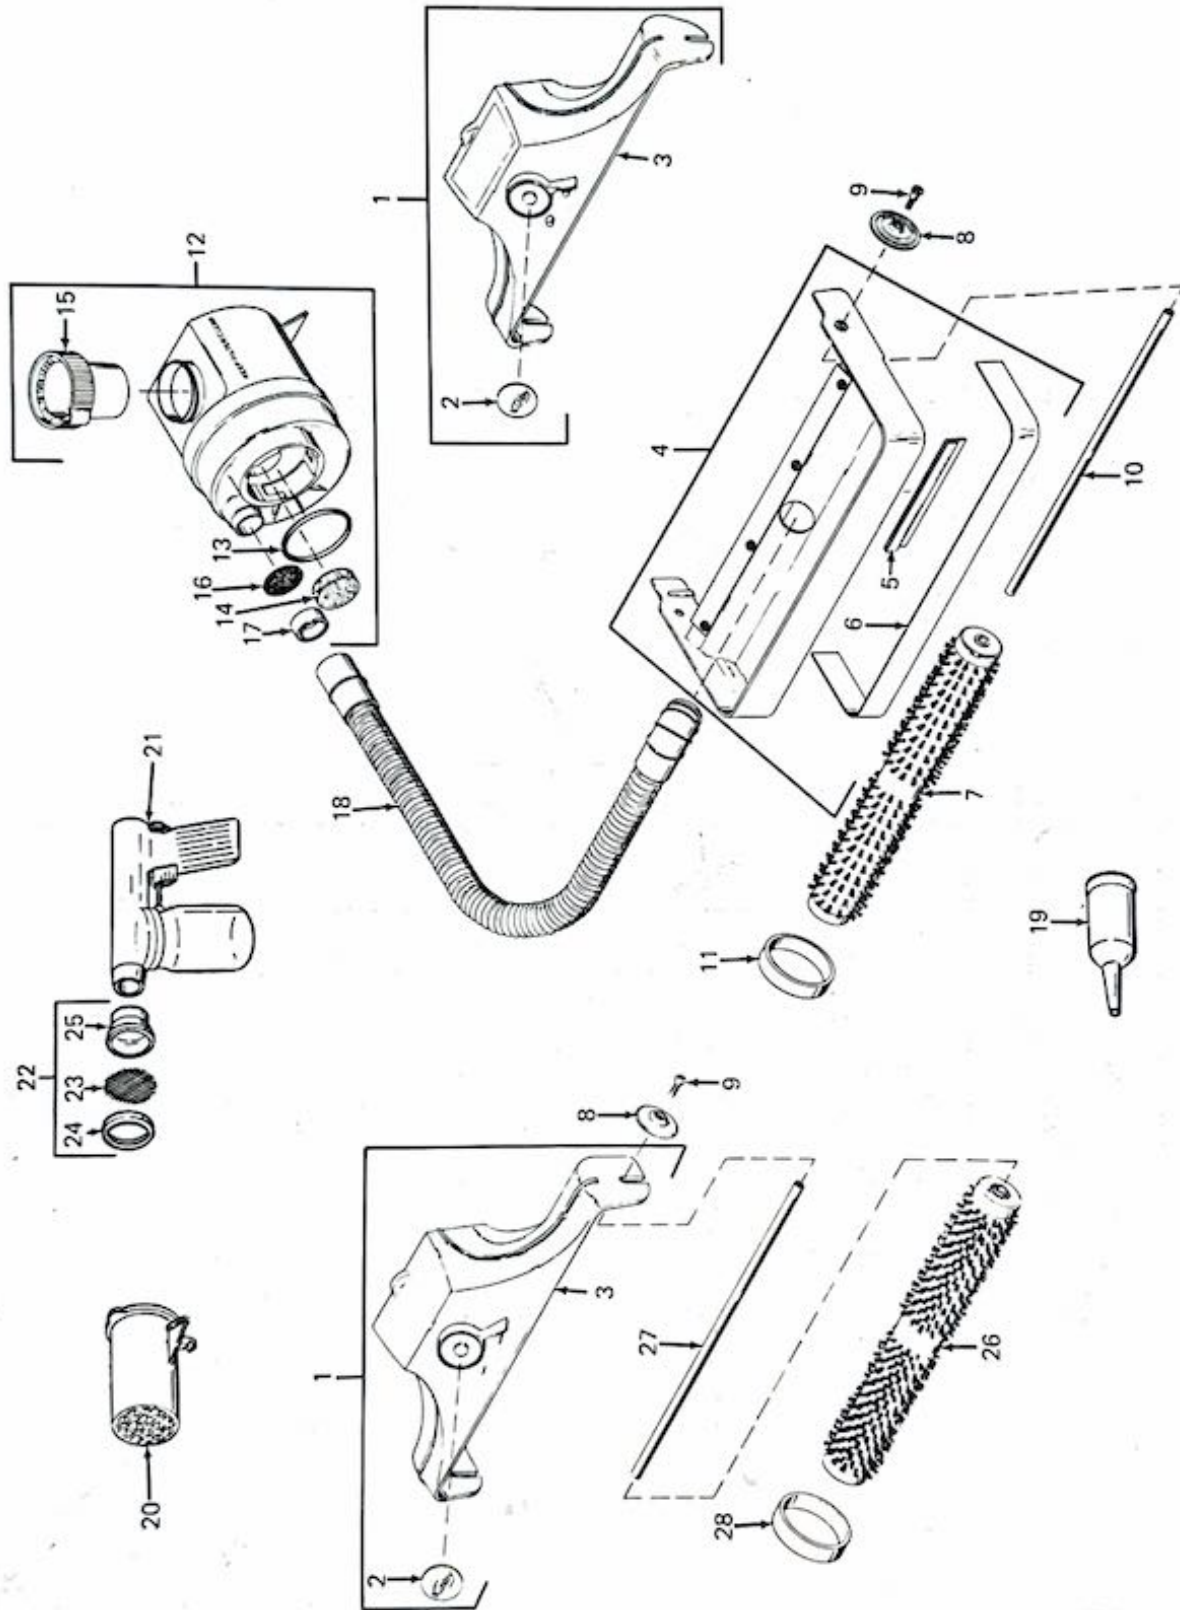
Kirby HERITAGE super renovator group, exploded view
